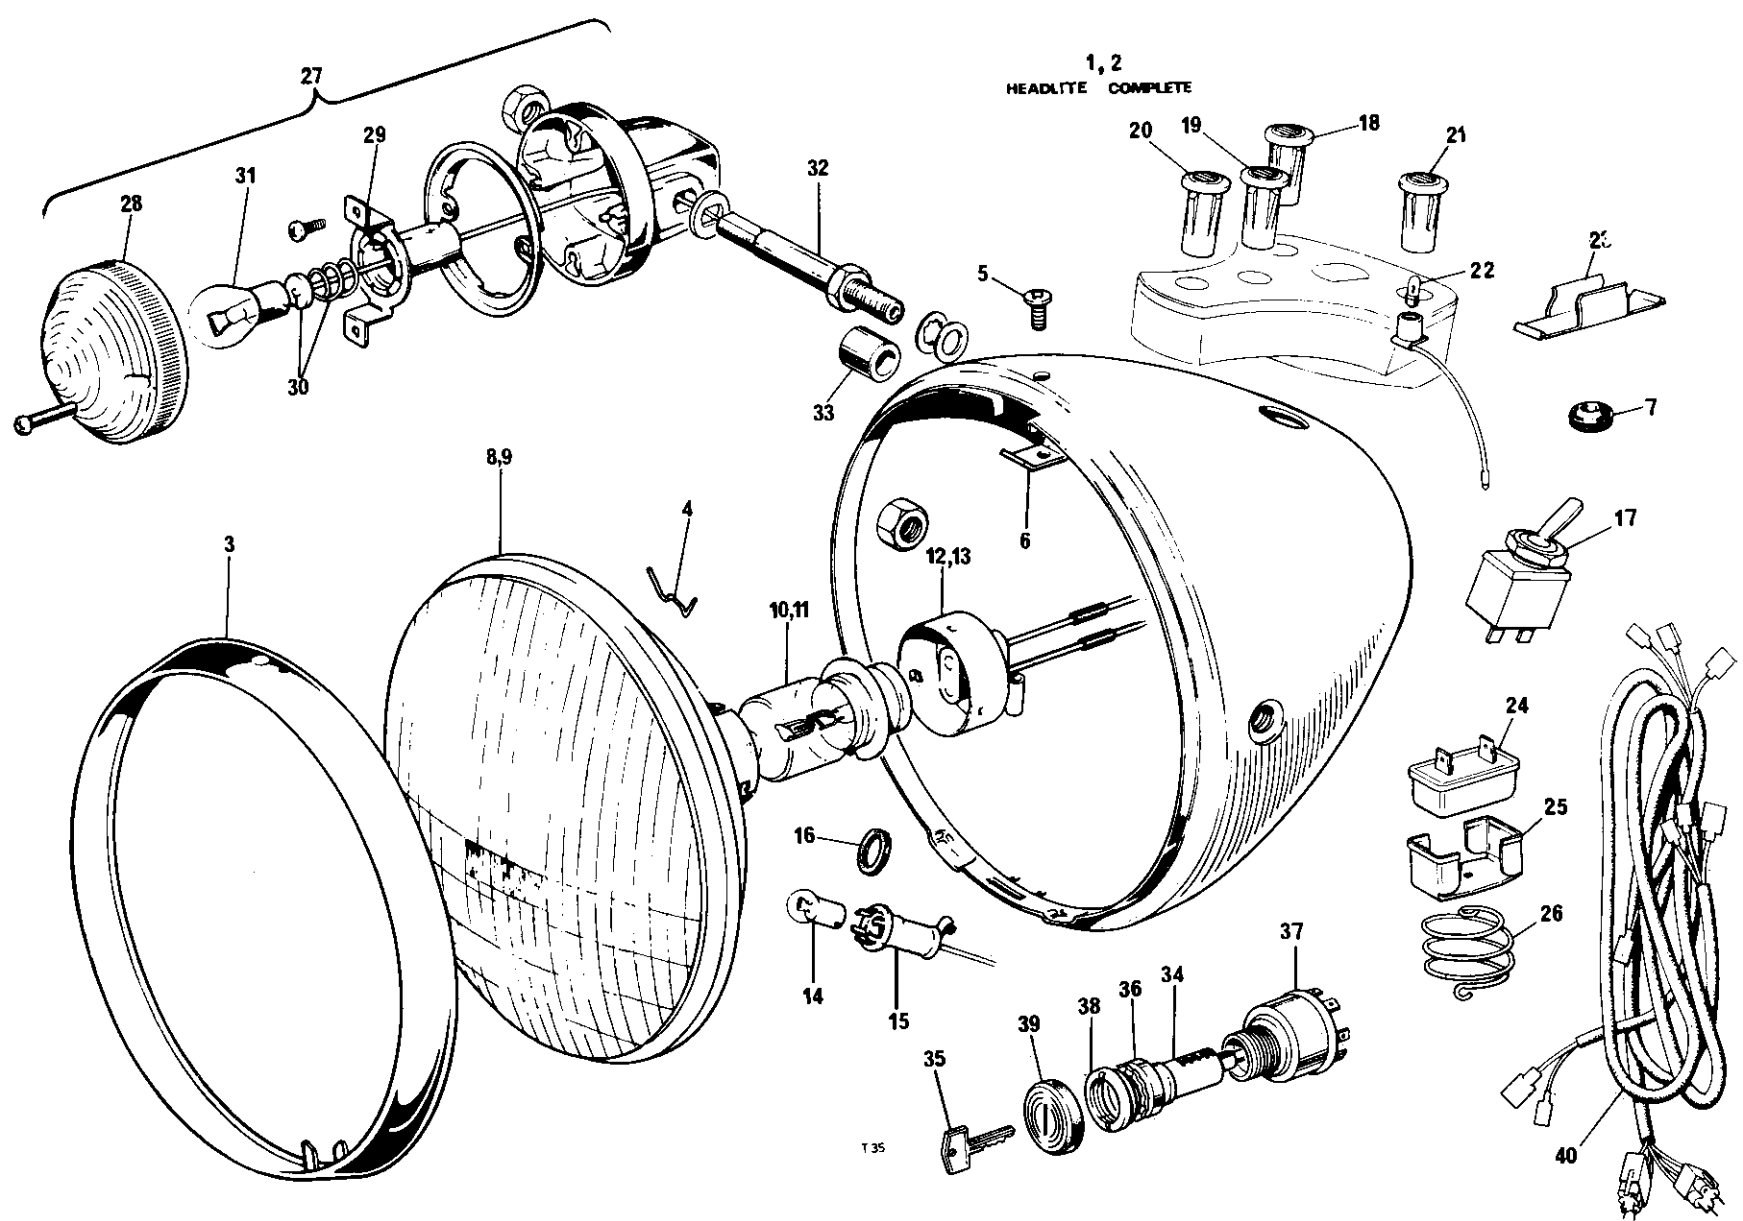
ELECTRICAL EQUIPMENT—HEADLITE, HARNES, DIRECTION INDICATORS
